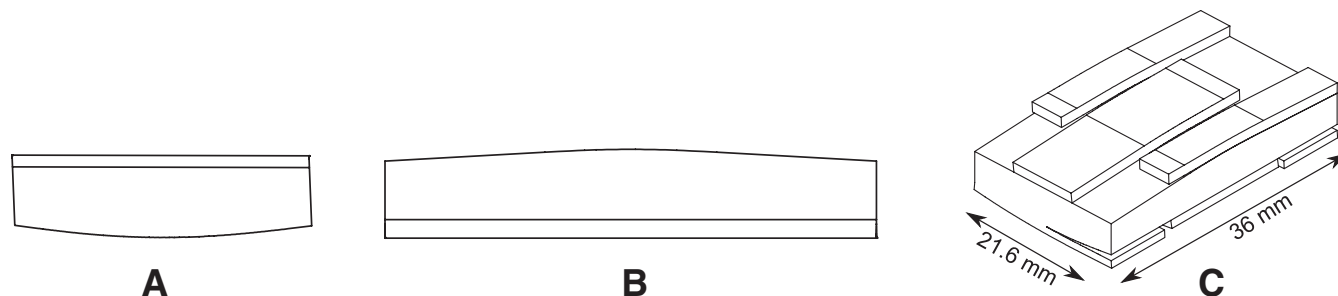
Resultant prototype surface geometry without flexures or endplates, in the (A) sagittal and (B) frontal planes. (C) An isometric view of the prototype surface and flexure geometry without endplates. A photograph of the prototype with endplates is shown in Fig. 2.
